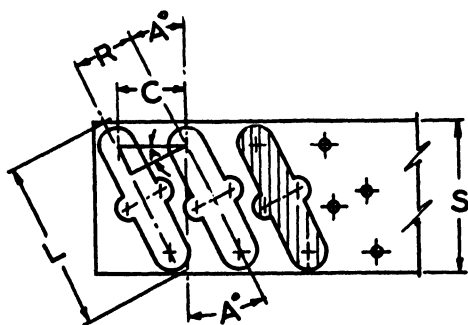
This layout is obviously not an economical one for the blank shown.
